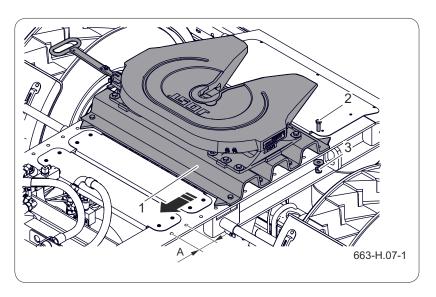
Longitudinal adjustment of the fifth wheel (1) seat plate (2) bolt (3) nut (A) longitudinal travel - ~ 104mm
